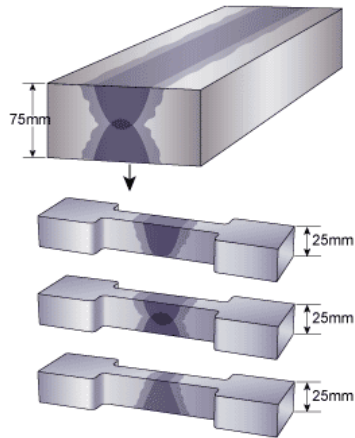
Tensile Test Specimen from single layer welded plates Reinforcement (TWI, 2004)
